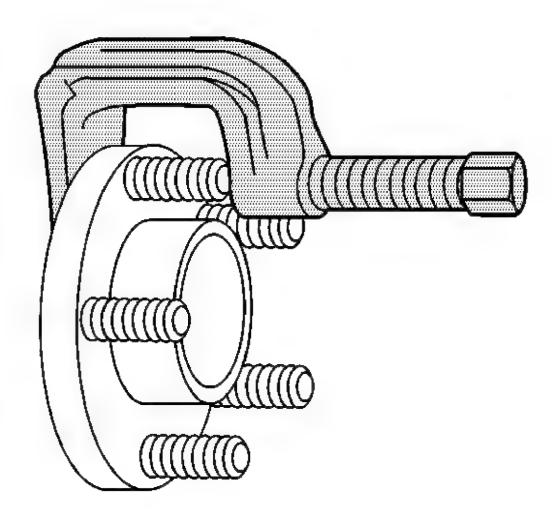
Removing Wheel Stud From Axle Flange Courtesy of GENERAL MOTORS CORP.
